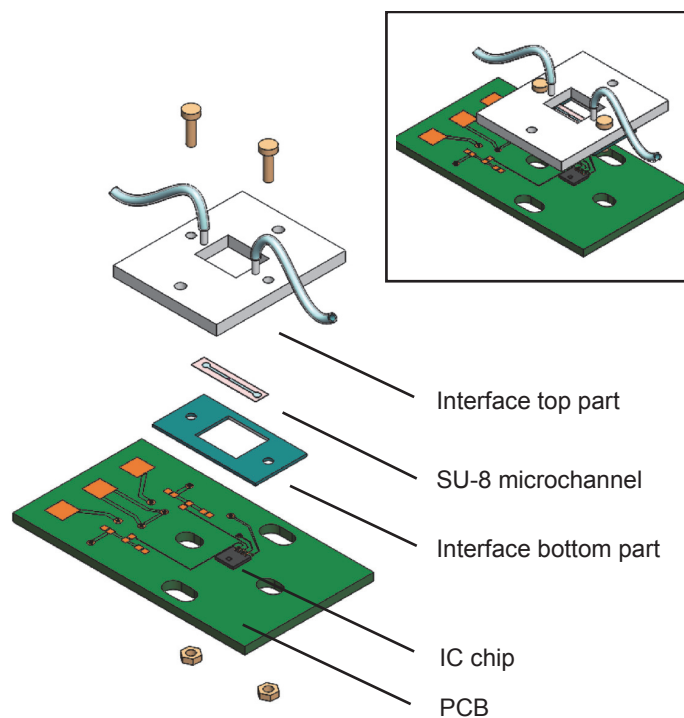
Illustration of the fluidic interfaces developed for the SU-8 microchannels. The exploded view of the system assembly. The IC chip is wire bonded on a PCB. The sealed fluidic device is created by assembling the microfabricated SU-8 channel with the interface bottom and top parts (top right inset). The sealed structure is then aligned with the IC detector coil and locked with screws and nuts.
